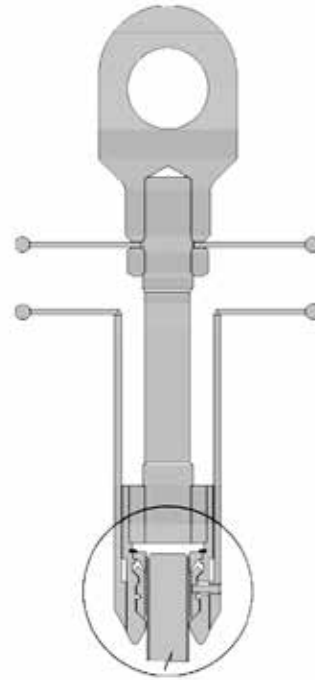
is a cross section showing the female thread segments (A) closed on the male threaded rod (B). The female thread segments close on the male threaded rod as the segments engage the internal taper of the housing (C) as load is applied to the rod (B). A coiled garter spring (D) urges the segments into engagement.
